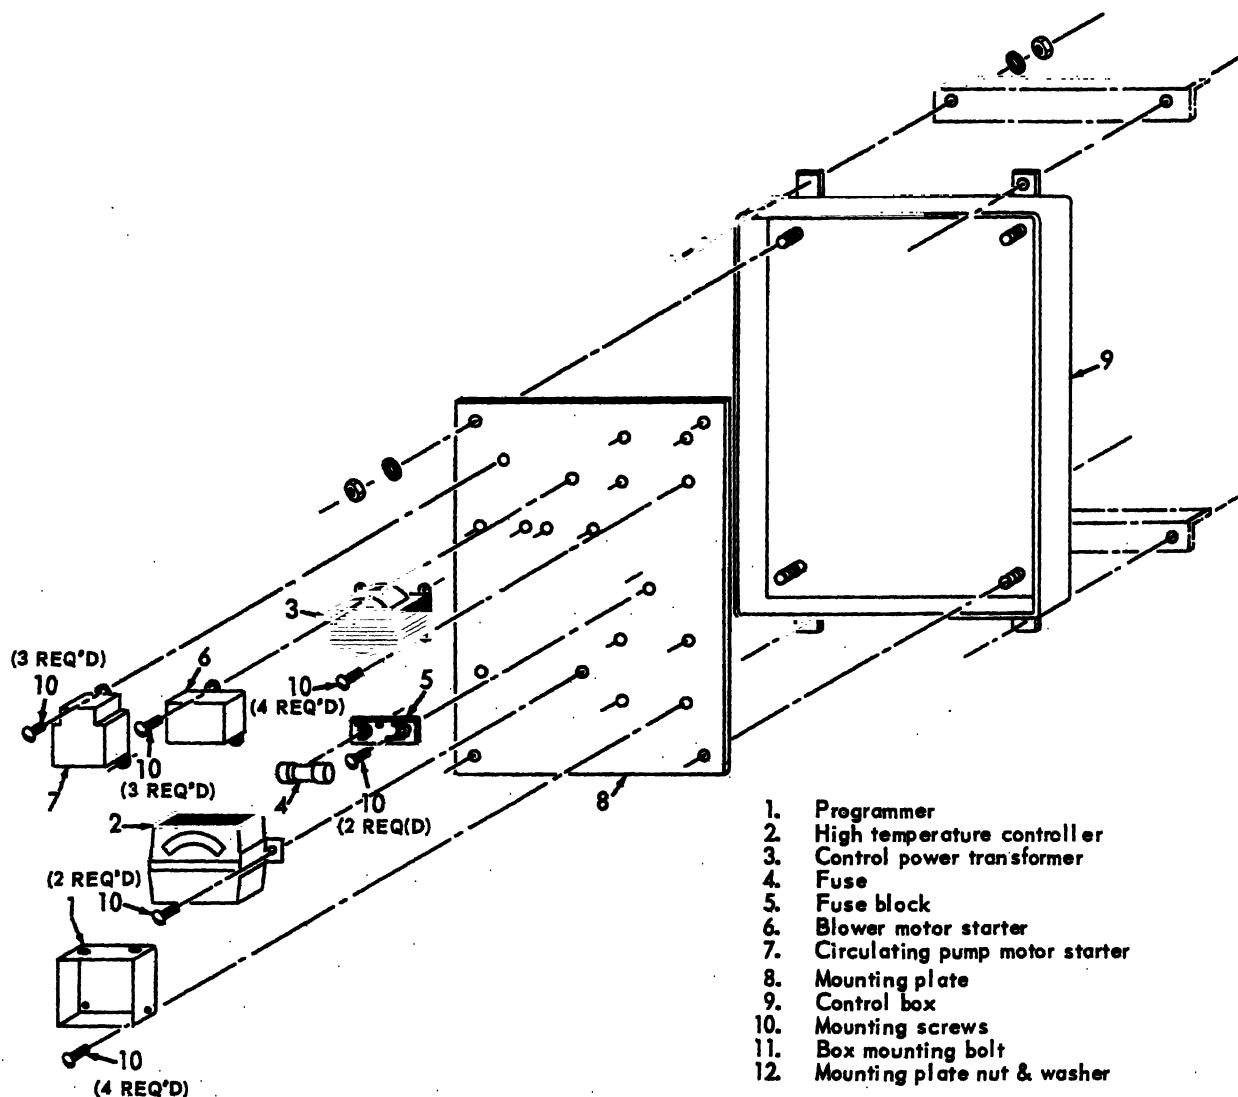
CONTROL BOX - DISASSEMBLY AND REASSEMBLY
